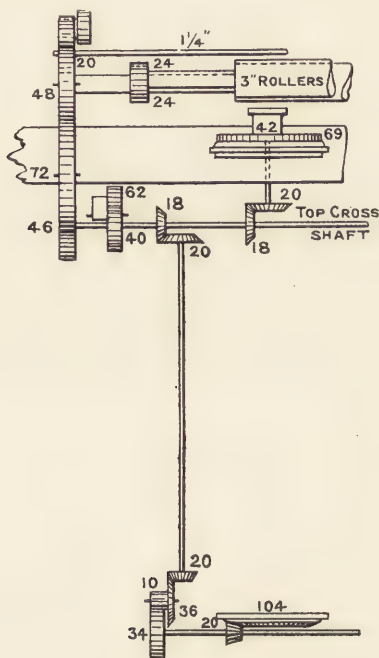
VIEW SHOWING GEARING FOR COILER TOP AND COILER BOTTOM.
